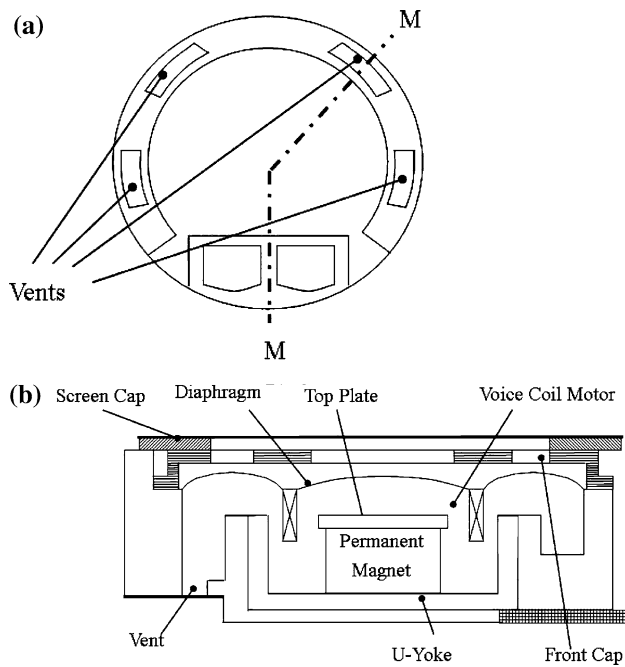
Schematic of the moving-coil type micro-speaker. a Bottom view, b M–M cross-sectional view
